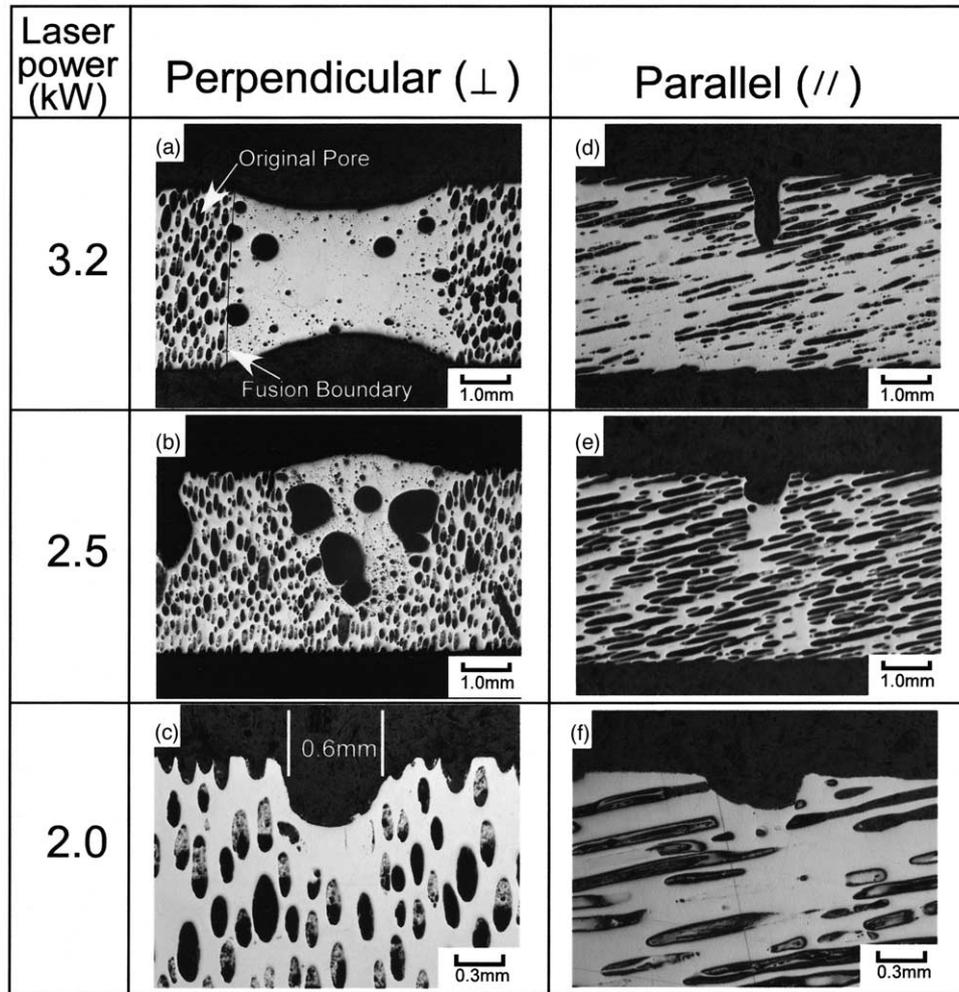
Cross-section of laser weld perpendicular to the welding direction in 4 mm thickness in the welding speed of 3.33 mm s^{-1} at the laser beam power of 3.2, 2.5 and 2.0 kW (a)–(c) perpendicular and (d)–(f) parallel to the pore growth directions, which slightly inclined to the work piece surface with about 10° .
